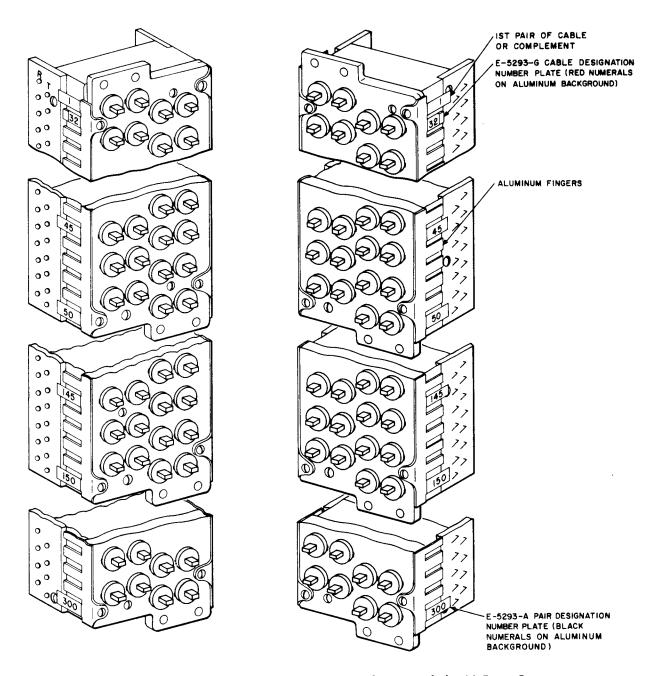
Number Plates on Aluminum Fingers of Superseded 300-Type Connector
